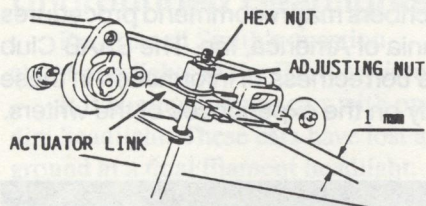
The actuator link-to-adjusting nut clearance is 1 mm.
